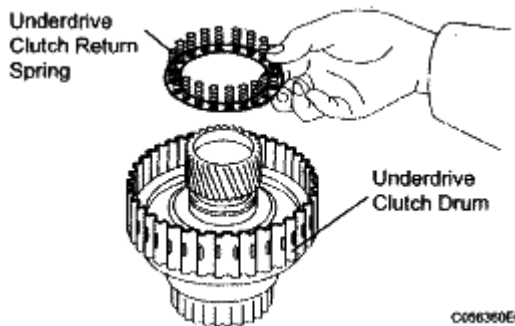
Removing Return Spring From Underdrive Clutch Drum
